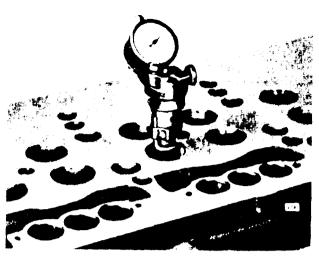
B-65. Determining Concentricity of Valve Seat Insert
